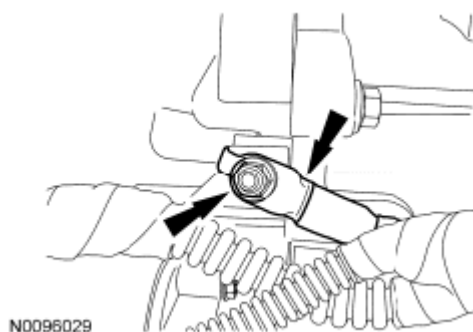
Locating Ground Wire & Starter Motor Stud Nut
